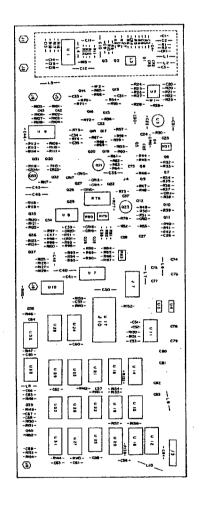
A4 Fractional N Loop Board Assembly Component Locations.
